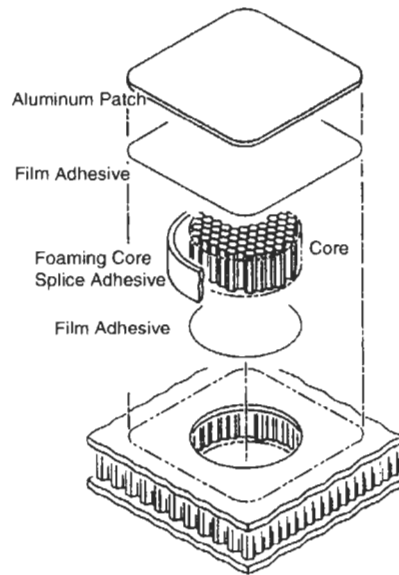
Typical one-side honeycomb assembly repair. Reproduced by permission of the Boeing Company.
